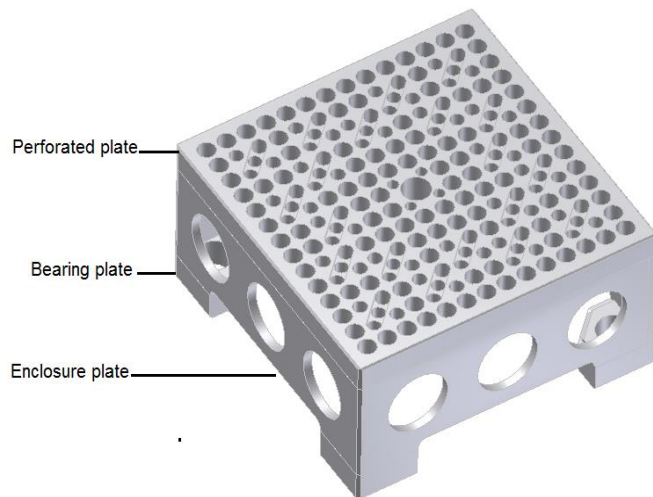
Bottom nozzle of CHASNUPP fuel assembly.
